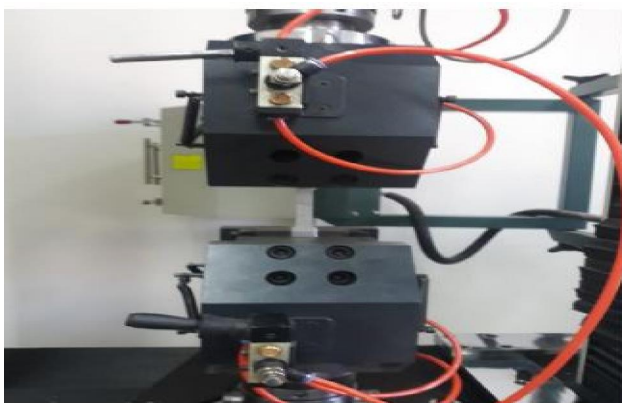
The tensile- shear test of friction stir welded joint
